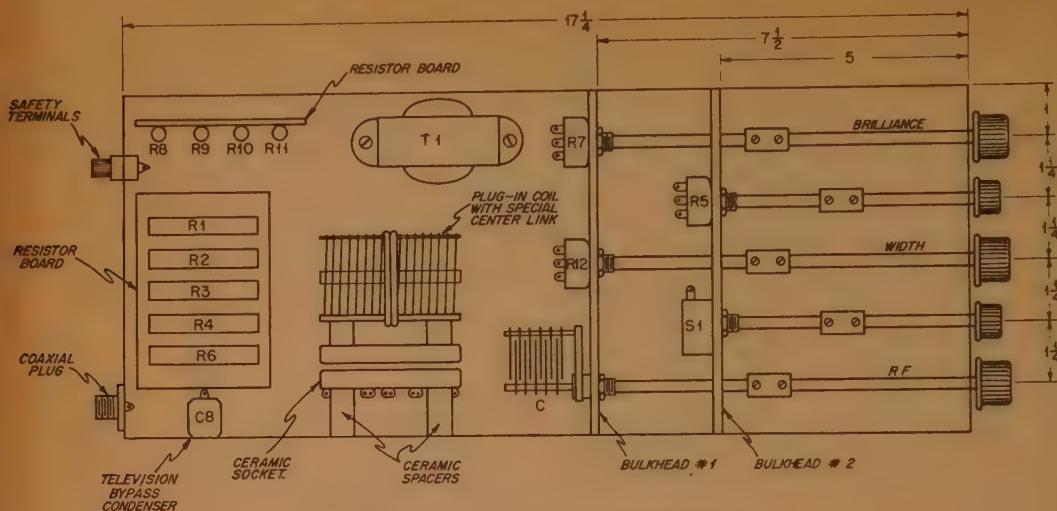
Bottom view of the chassis layout using a BUD model CA-1126 chassis.
